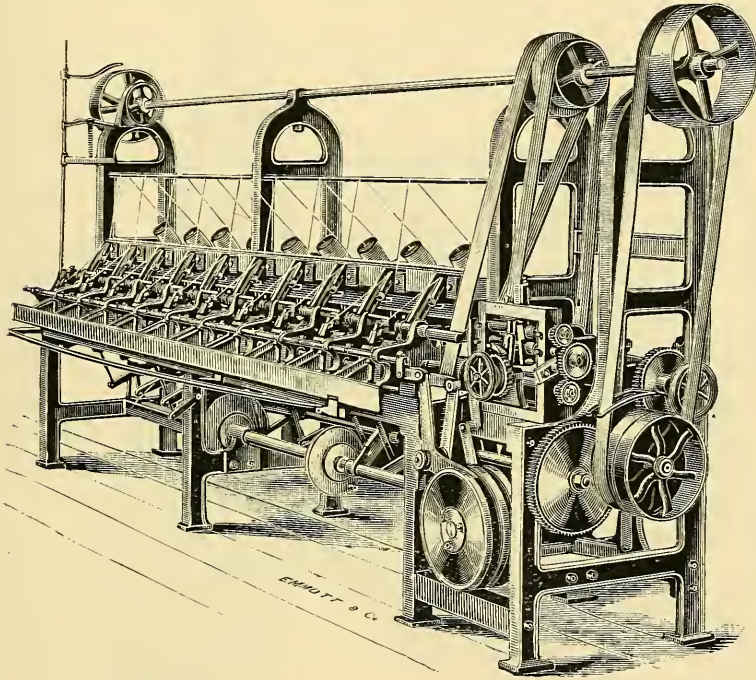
Improved self-acting spooling machine (Weild's principle).
